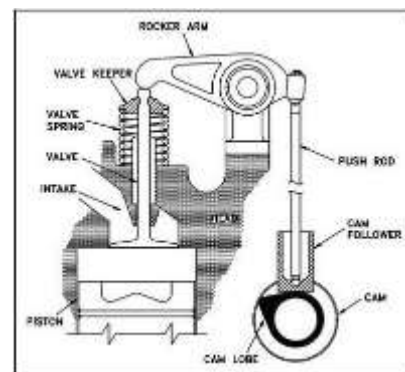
Valve Gear Mechanism of I C Engine (Joseph E. Shigley, 1996).
